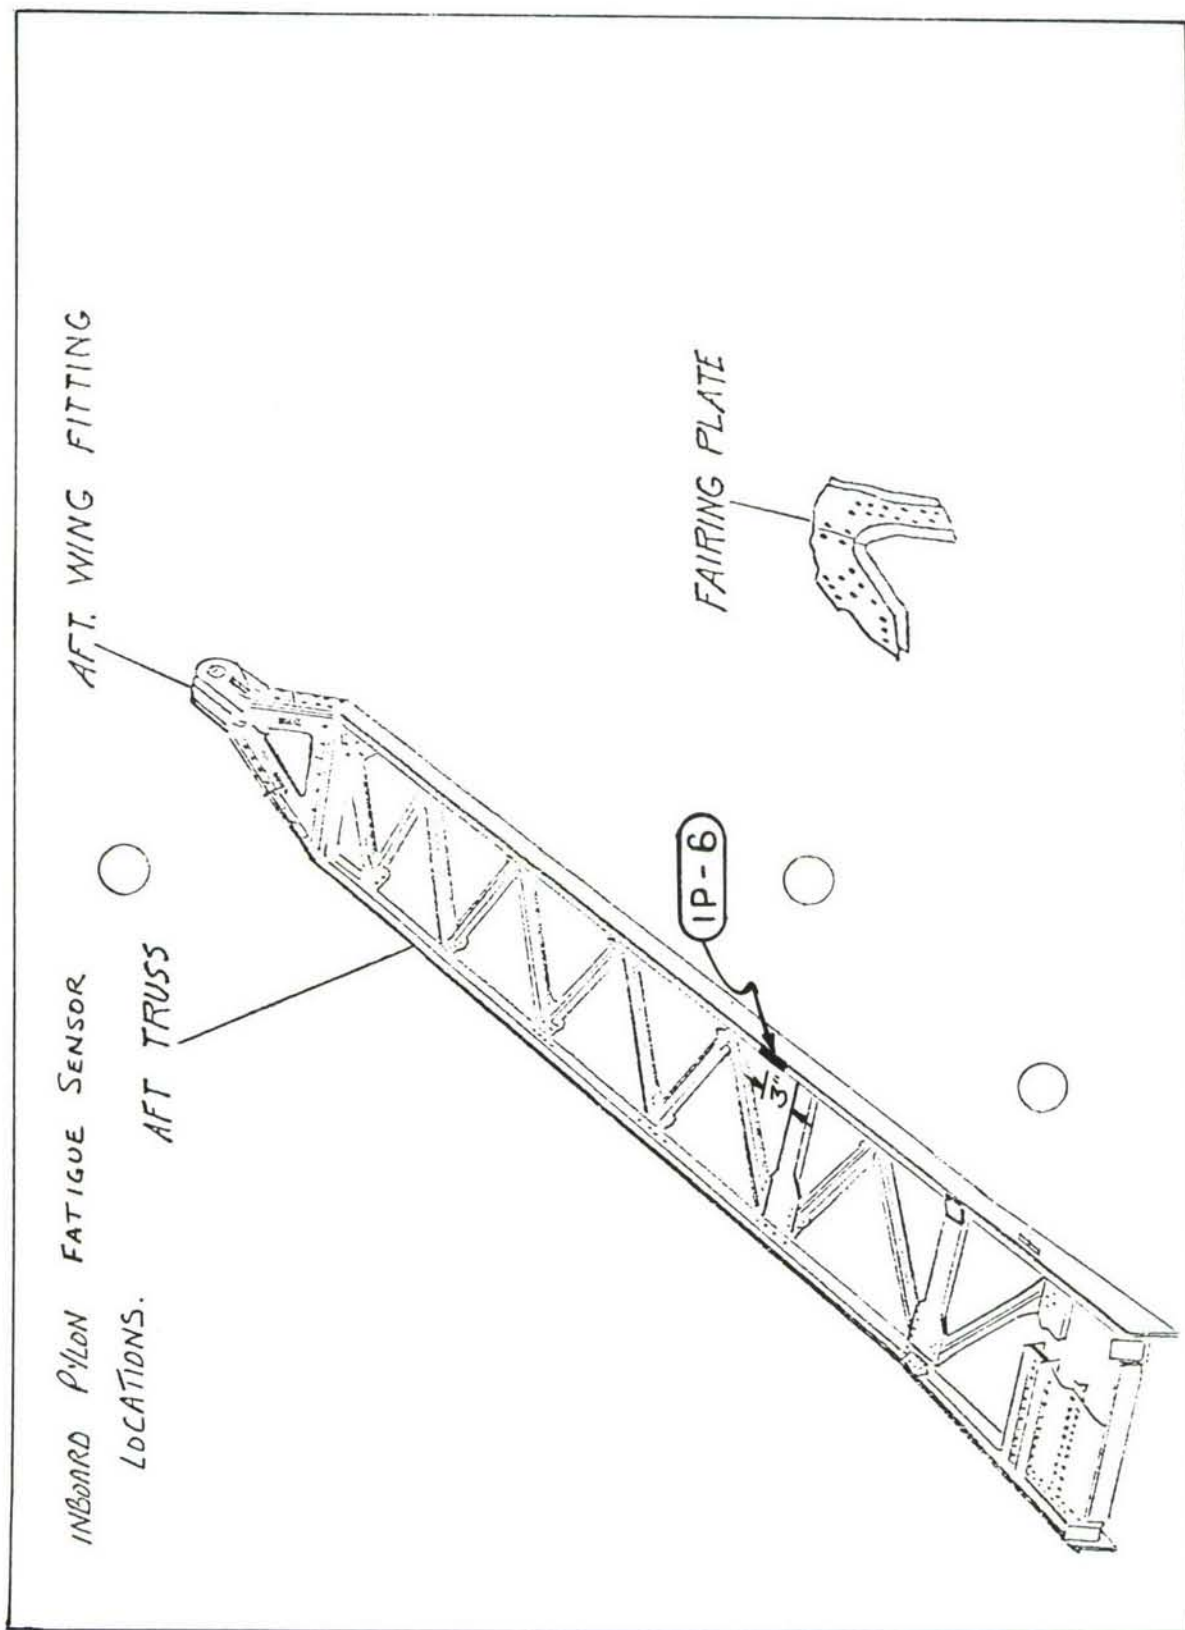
SENSOR LOCATED ON PYLON AFT TRUSS FITTING
